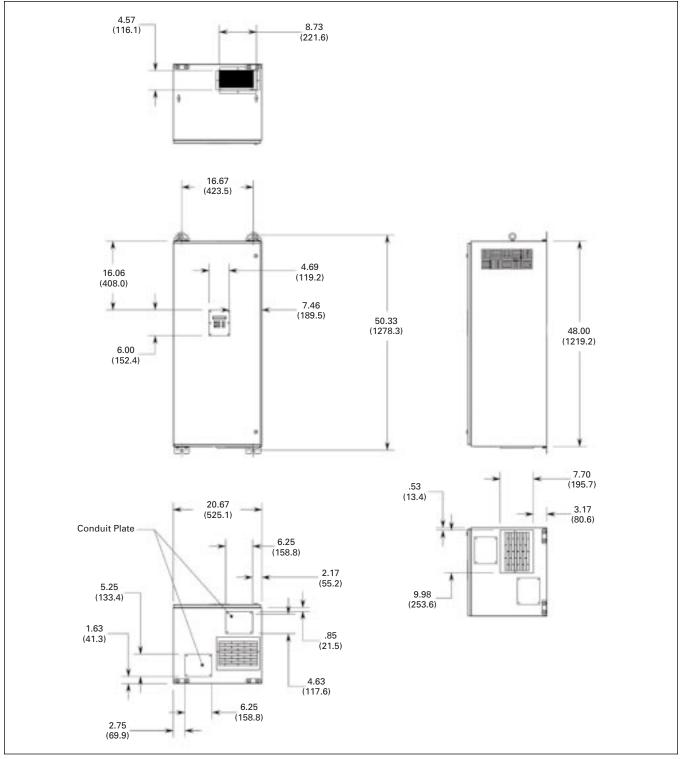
HCU050 — 50 Amperes — Dimensions in Inches (mm)
